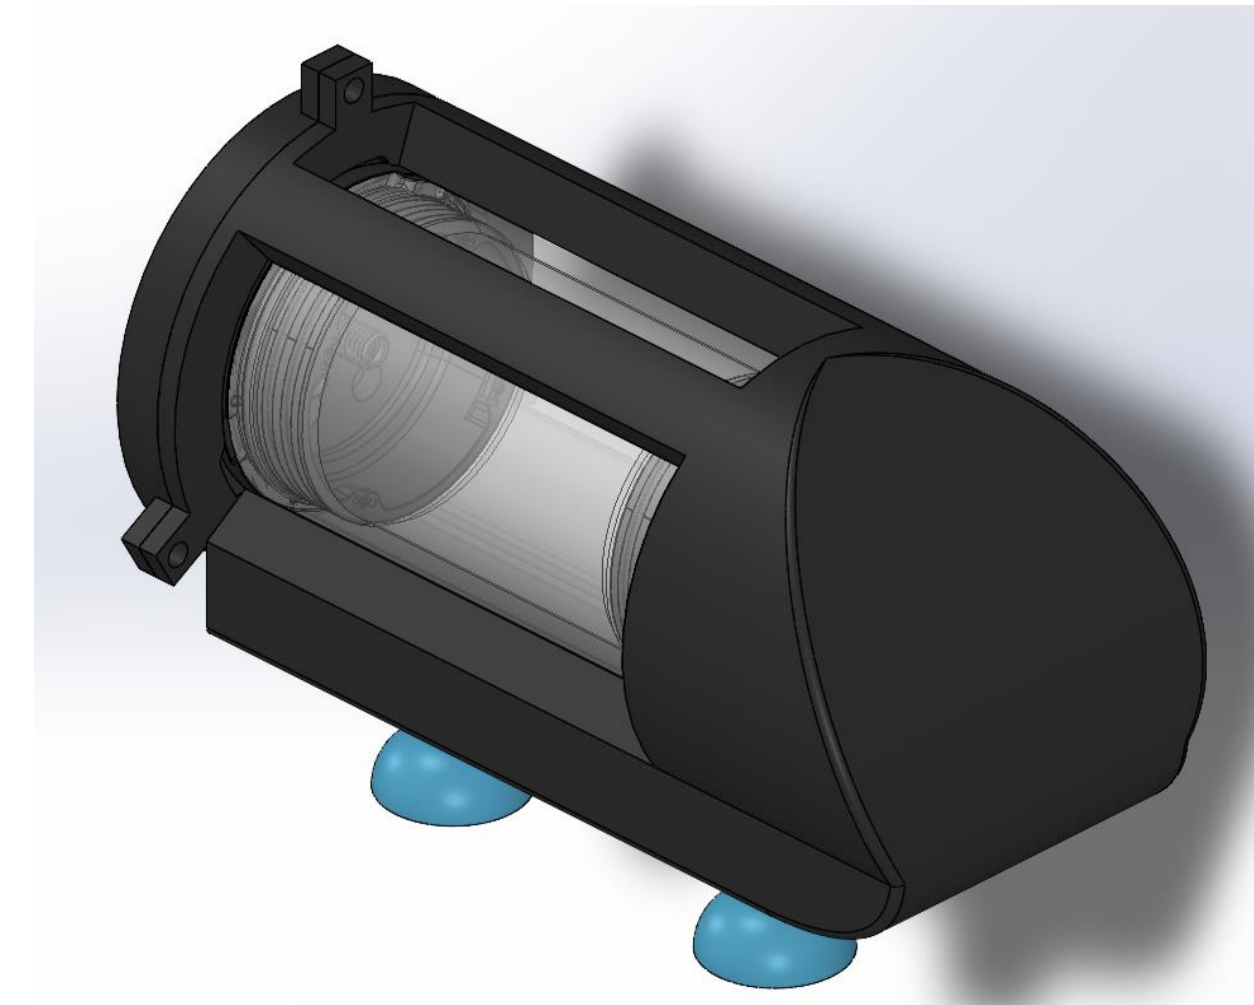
An isometric view of a SolidWorks assembly of the design for the housing unit, consisting of the main shell and rear lid.
